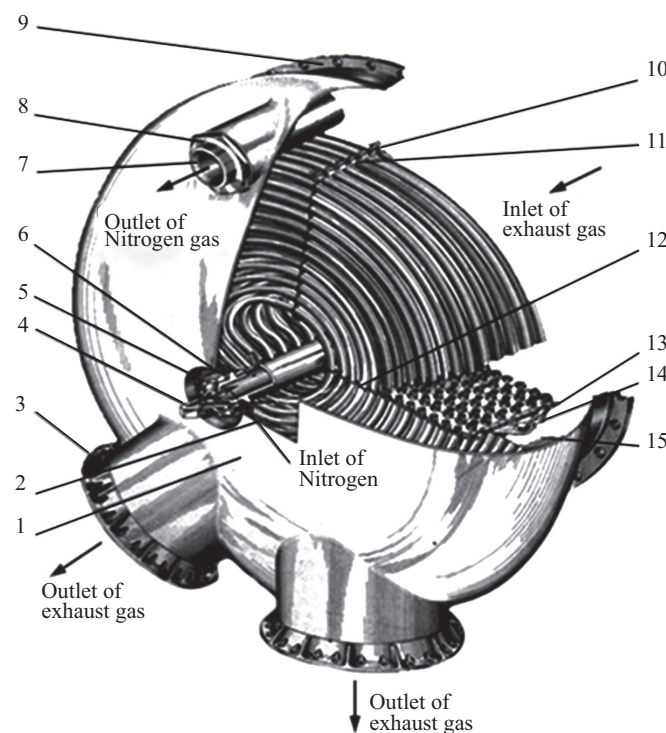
Section view of the RD-107 shell-and-tube heat exchanger:
